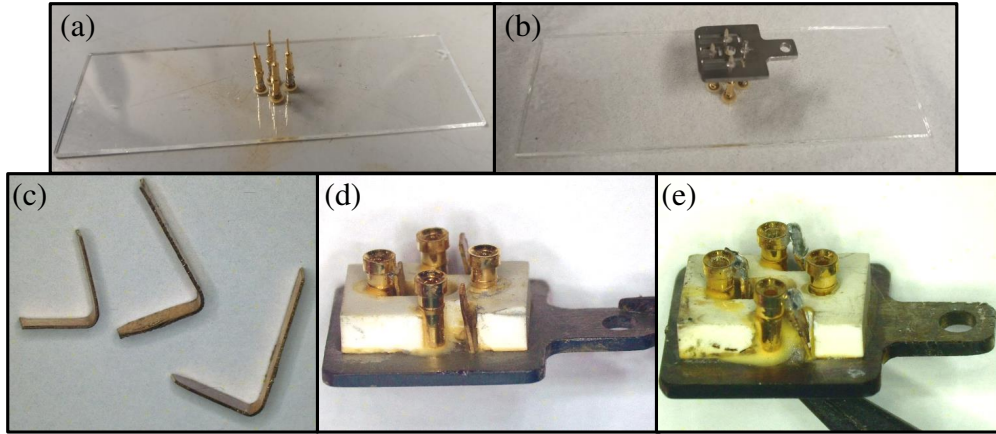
Photographs instructing the assembly of mask shuttle with contact pins (a) Preparation of pin assist on a glass slide. (b) Placement of ceramic spacer and shuttle onto pins. (c) CuBe plates for contacting gold pins, (d) Placement of CuBe plates through shuttle with insulating epoxy. (e) Contacting of CuBe plates to gold pins.
